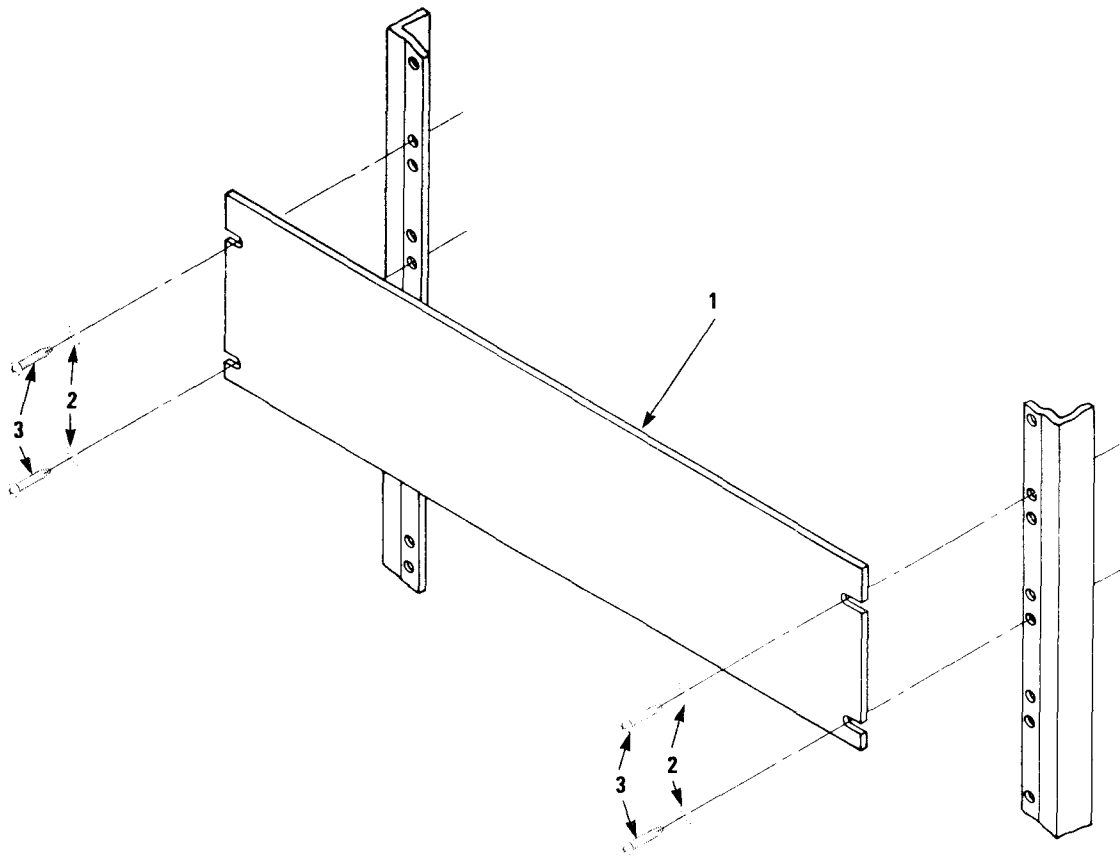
Blank Panel 5-1/4 in. X 19 in. Mounting
